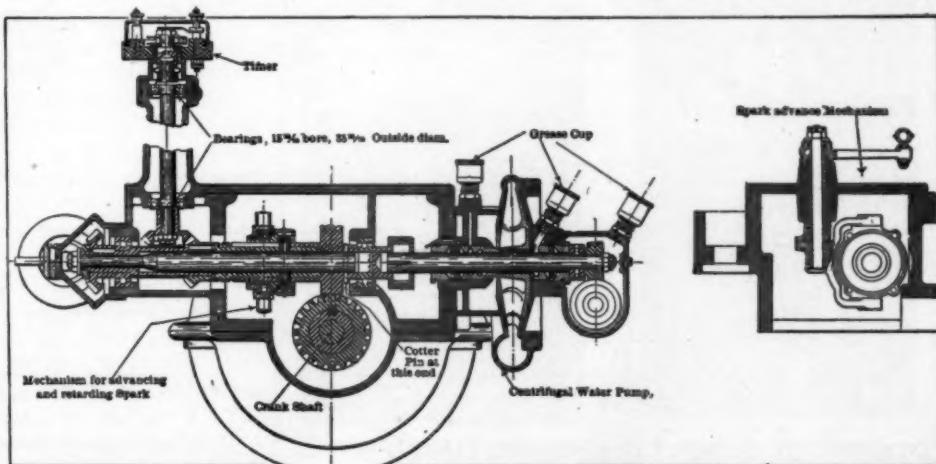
Section of crankcase at lateral shaft, depicting water pump in section, drive for magneto and method of advancing the spark
